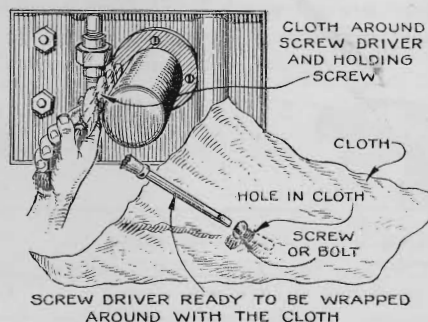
Screw pushed through a cloth can be held securely and threaded into hard places.
